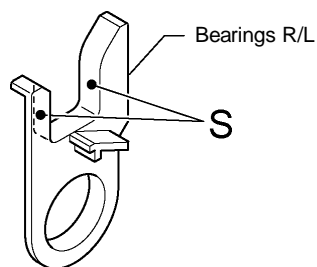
Sliding Surfaces of Sub Roller Shafts in Bearings R/L
